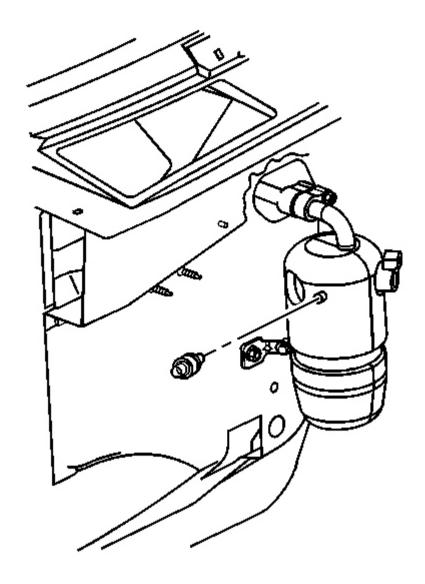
A/C Low Pressure Switch & Accumulator Courtesy of GENERAL MOTORS CORP.
